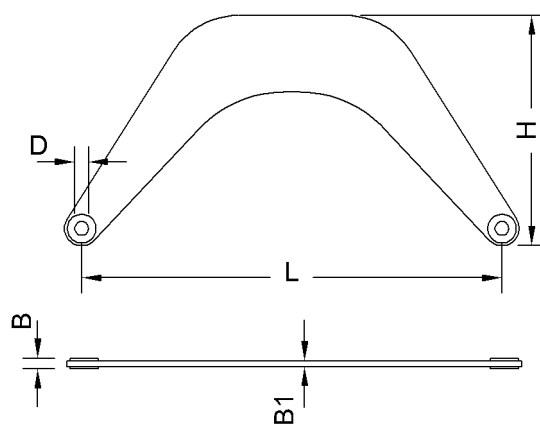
Dimensions of the mid-point suspension spacer bracket on the main boom after the attached reducing piece
